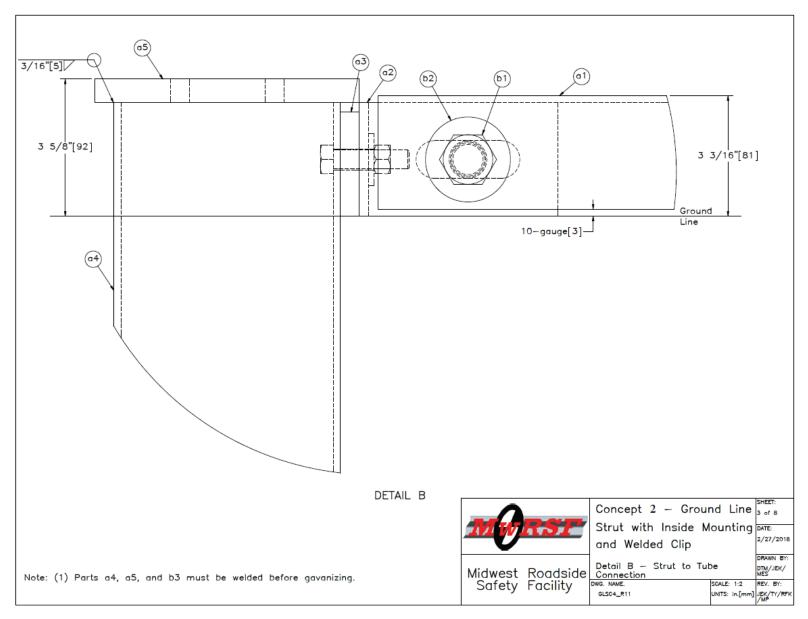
Ground Line Strut Design Concept No. 2 – Strut to Tube Connection
